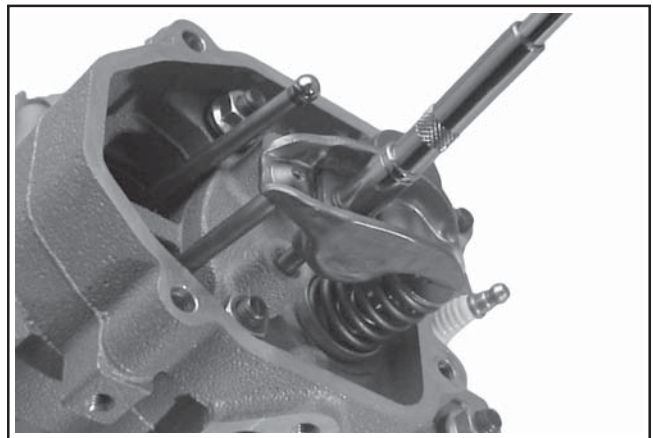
Mounting the Rocker Arm onto the Cylinder Head.
